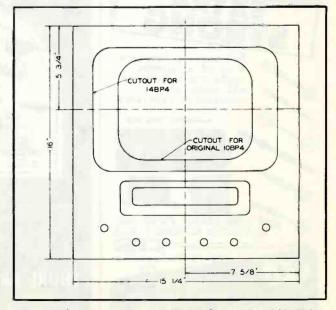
Dimensions of Panel Cutout for 14" Tube.
